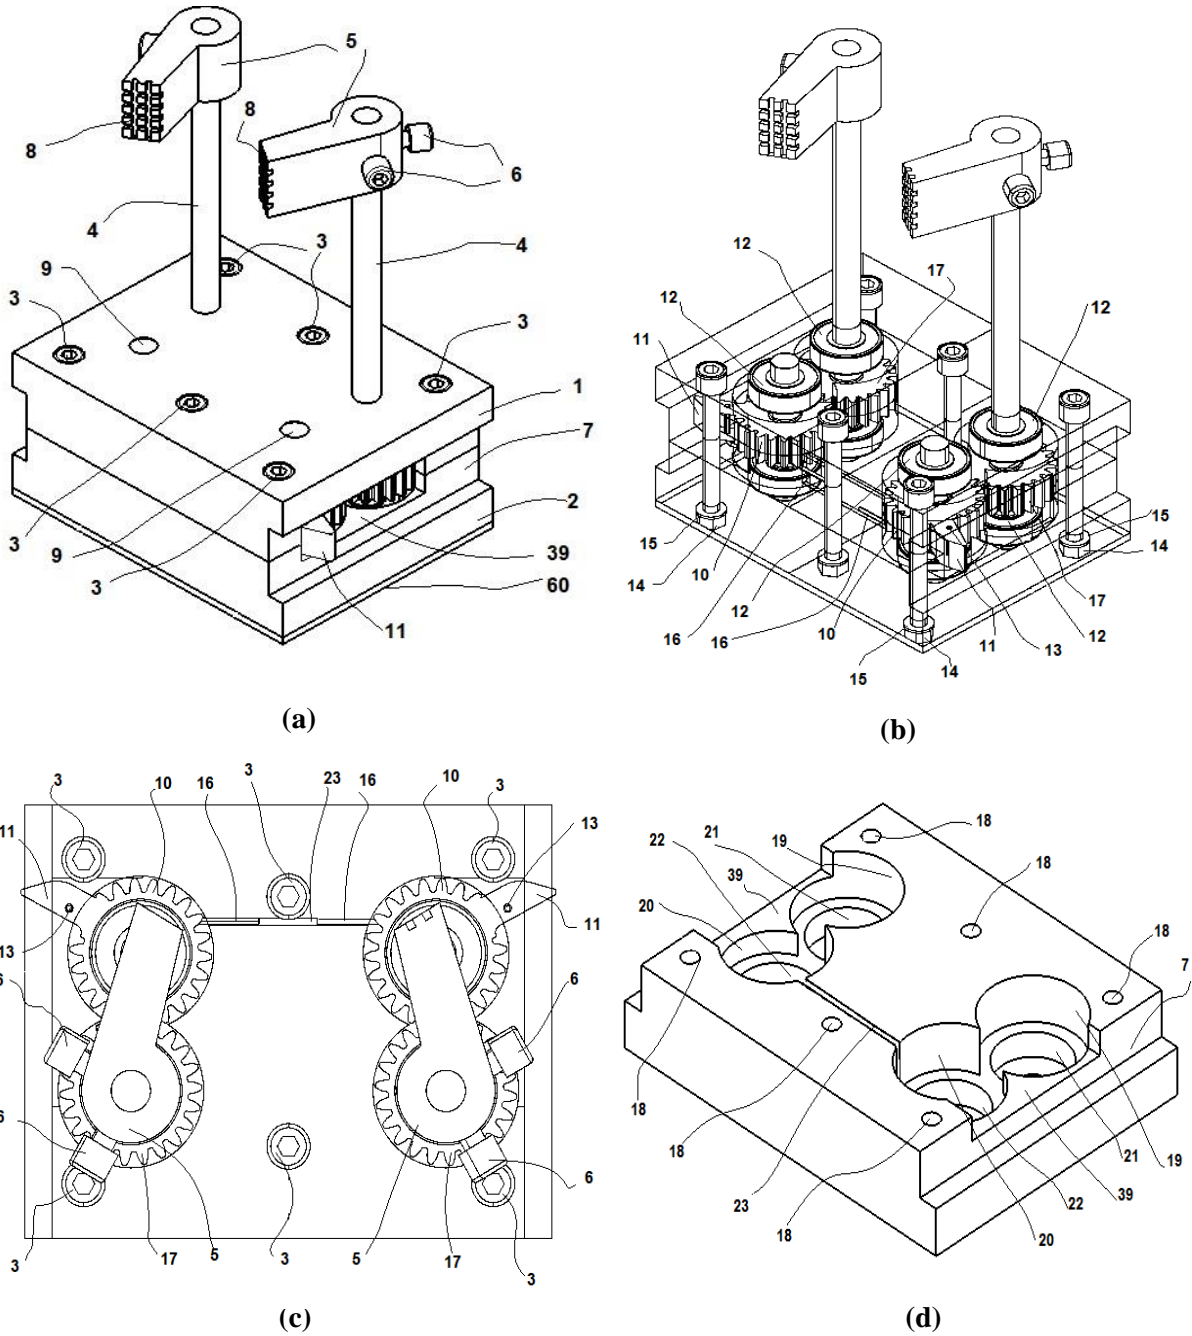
Fish gripper design: a) 3D view of the gripper set with the fingers in the open position, b) internal components of the gripper, c) lower block, d) 2D image of the gripper with the driver and driven gears.
